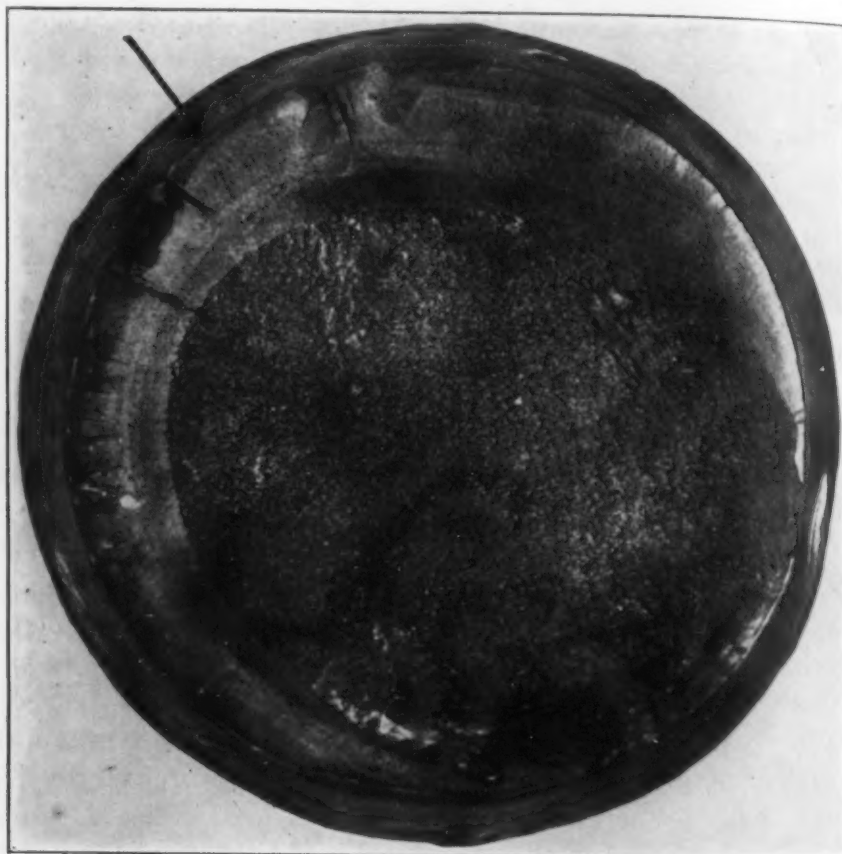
Failed 9½-inch Axle. Fracture in Detail, Due to Sharp Fillet
